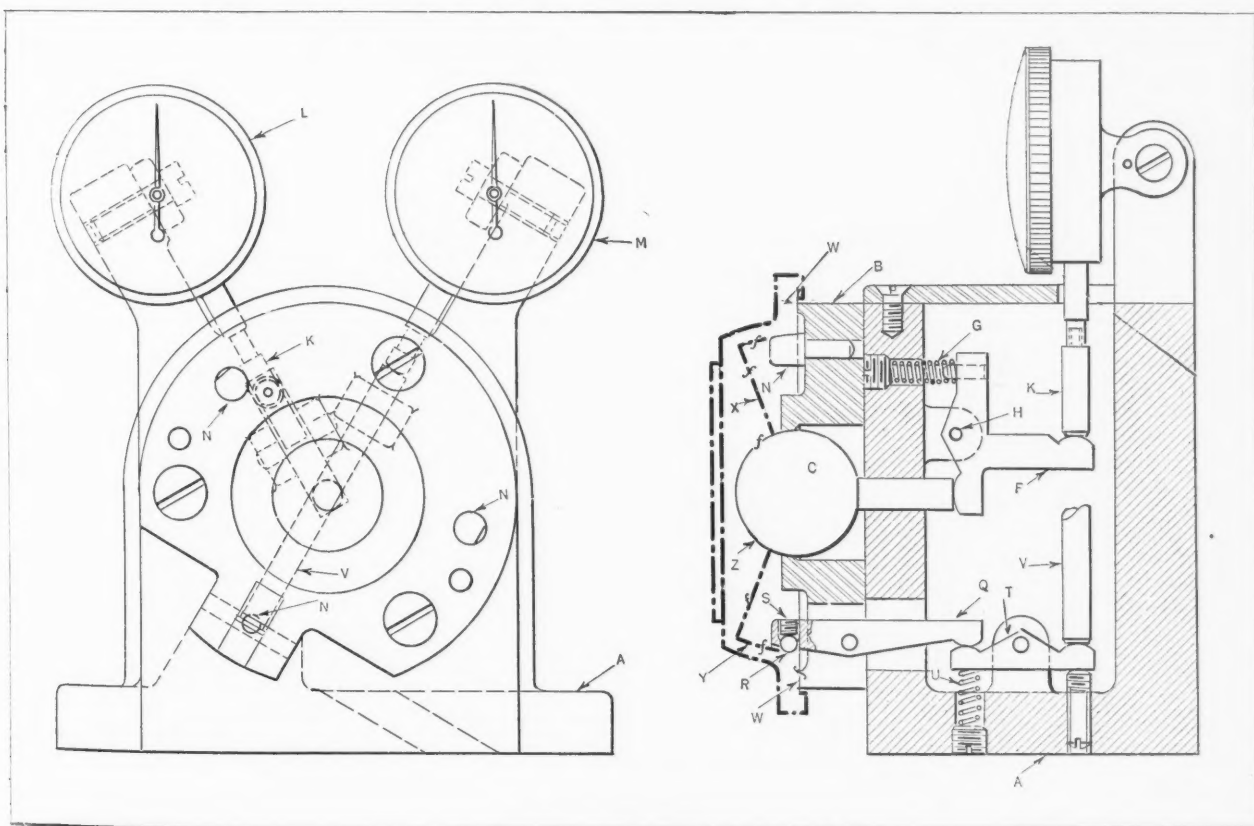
Dial Gage for Machined Surfaces on Brass Casting
